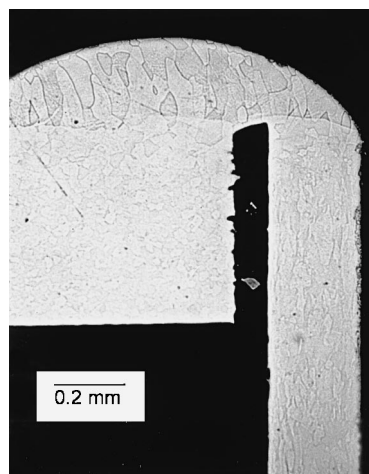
Optical photomicrograph of specimen closure weld made with electron-beam welder.
